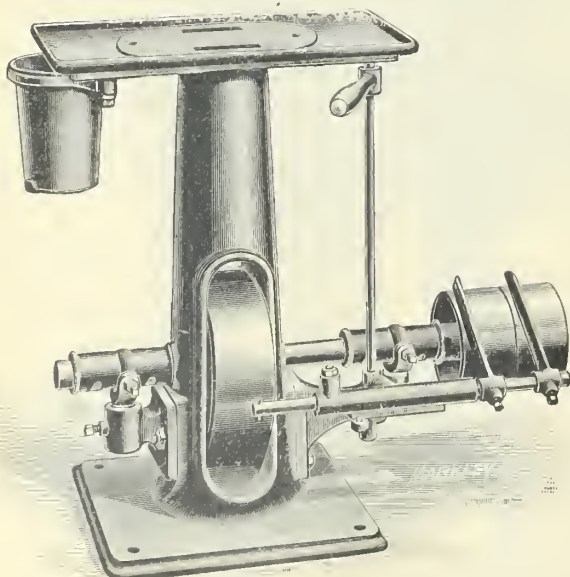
Countershaft column furnished for mounted head shown above, for belting direct to main shaft.
